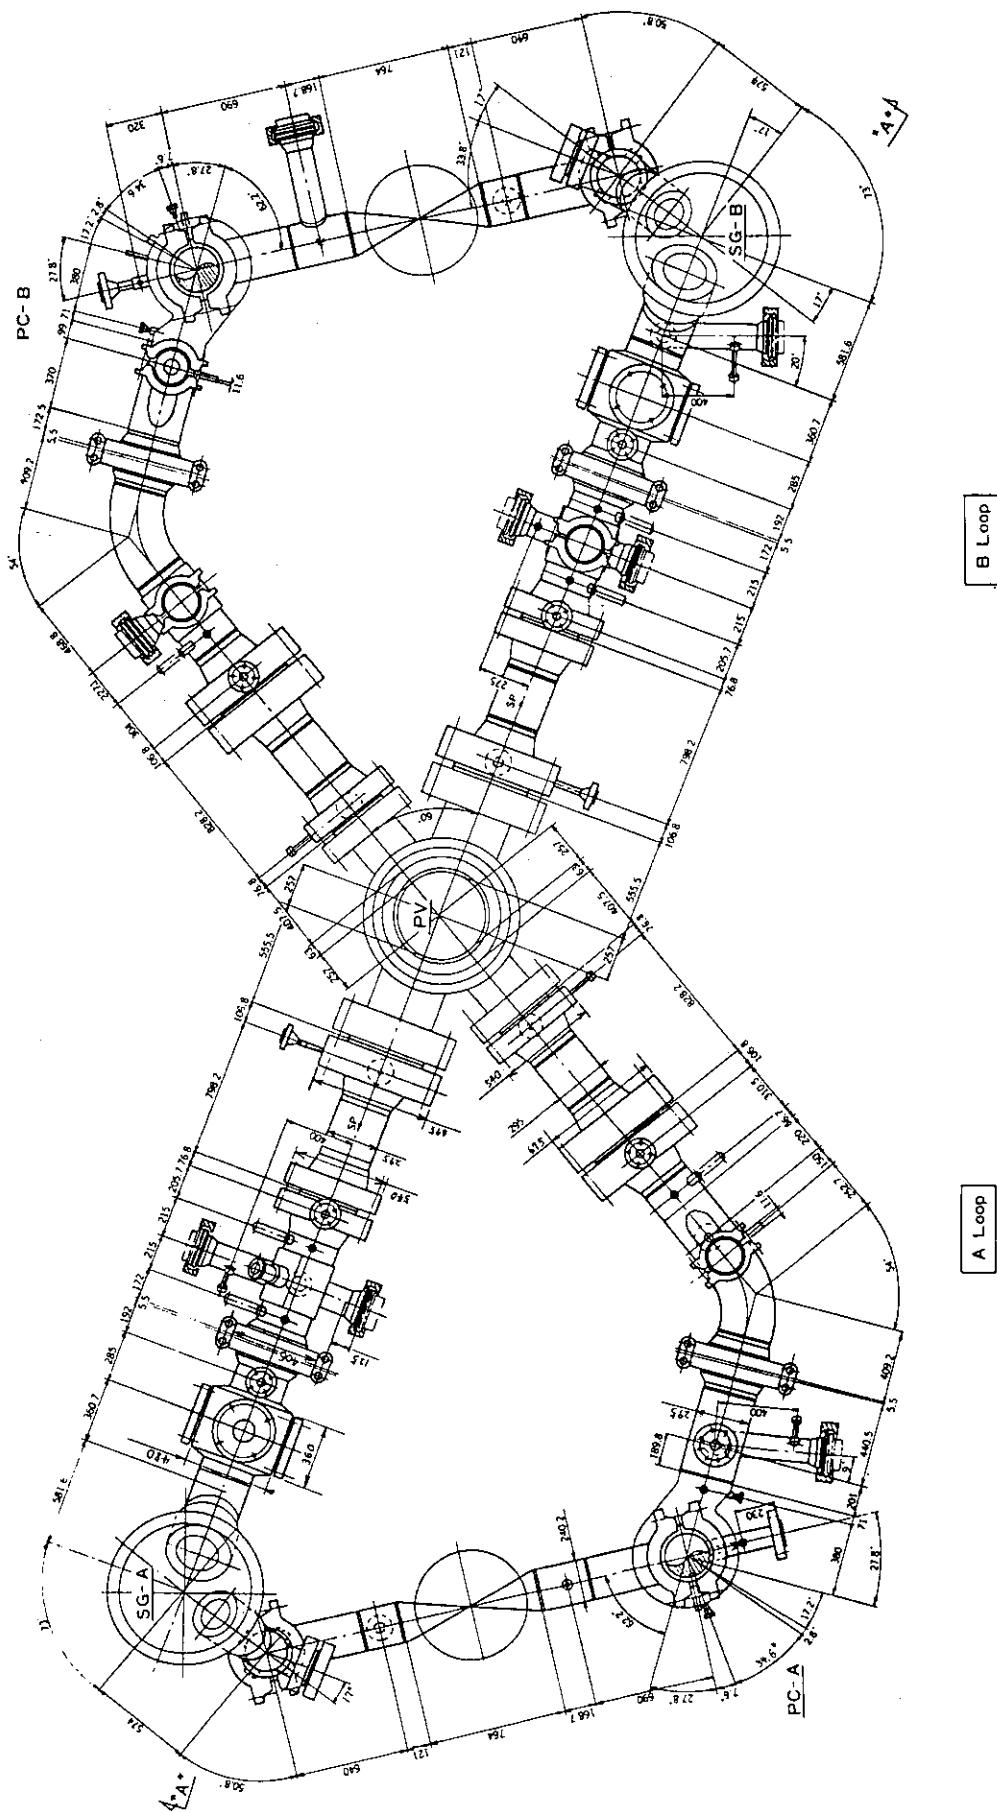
Primary Loop Dimensions (Plan View)
